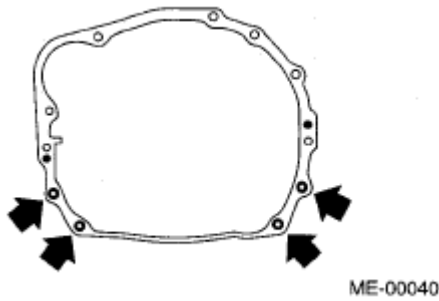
Identifying Engine Transmission Nuts - Lower Side
